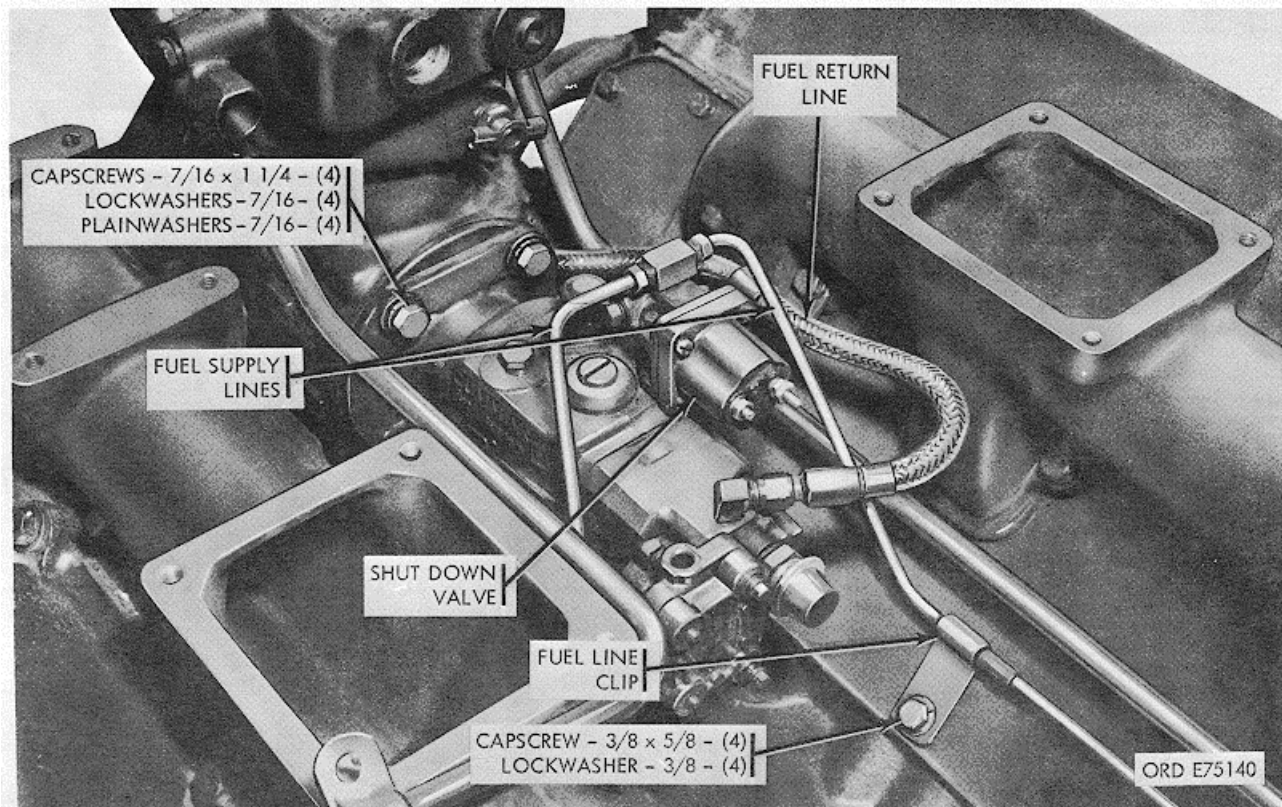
Intake manifolds fuel pump and fuel lines--removal/installation.
